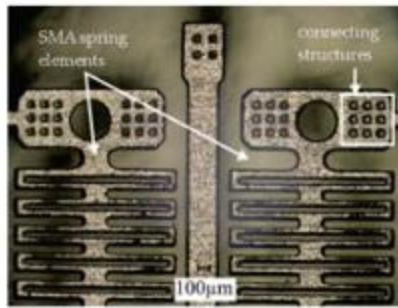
Micro “Box”-Type SMA Spring Actuator Laser-Machined (Reprinted from [44])
